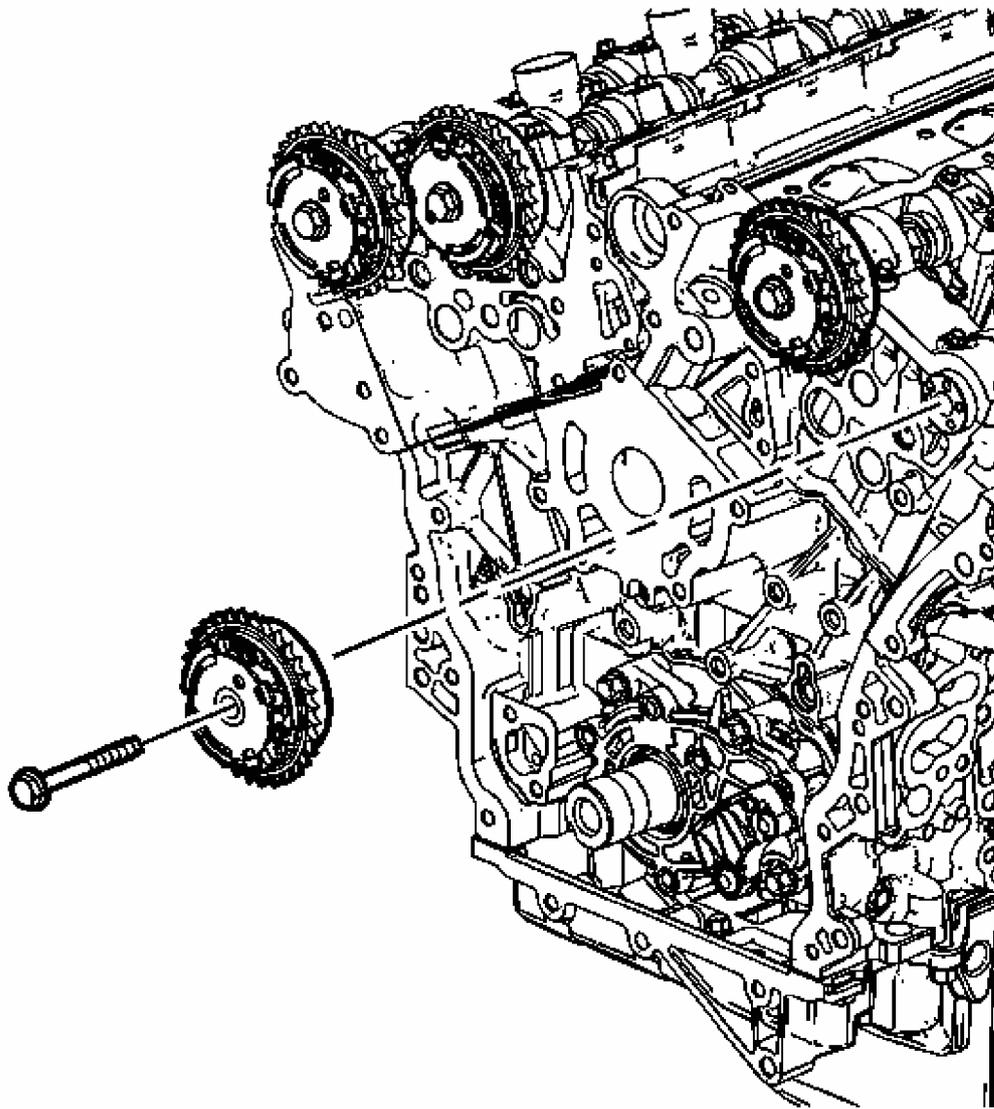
View Of Camshaft Position (CMP) Actuator - Bank 2 Exhaust
